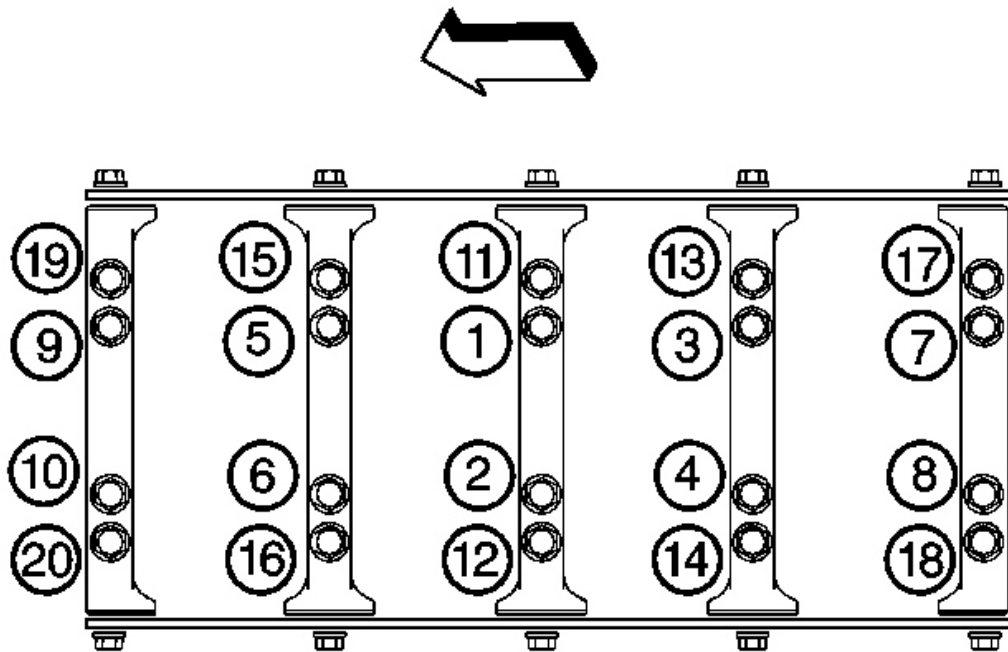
Identifying Main Cap Bolt Hole Tightening Sequence
